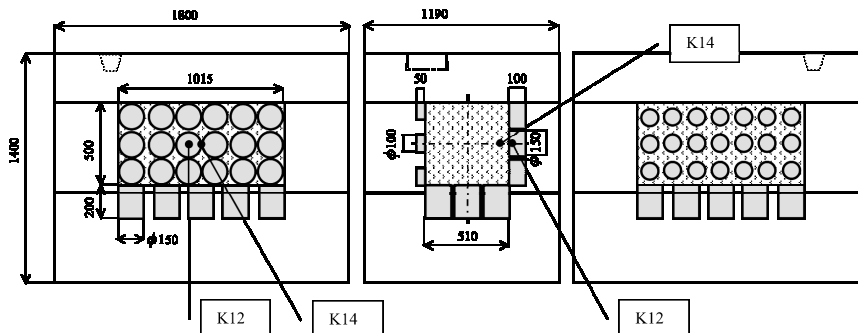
A picture showing the forming of casting no. 2 with chills on three sides
